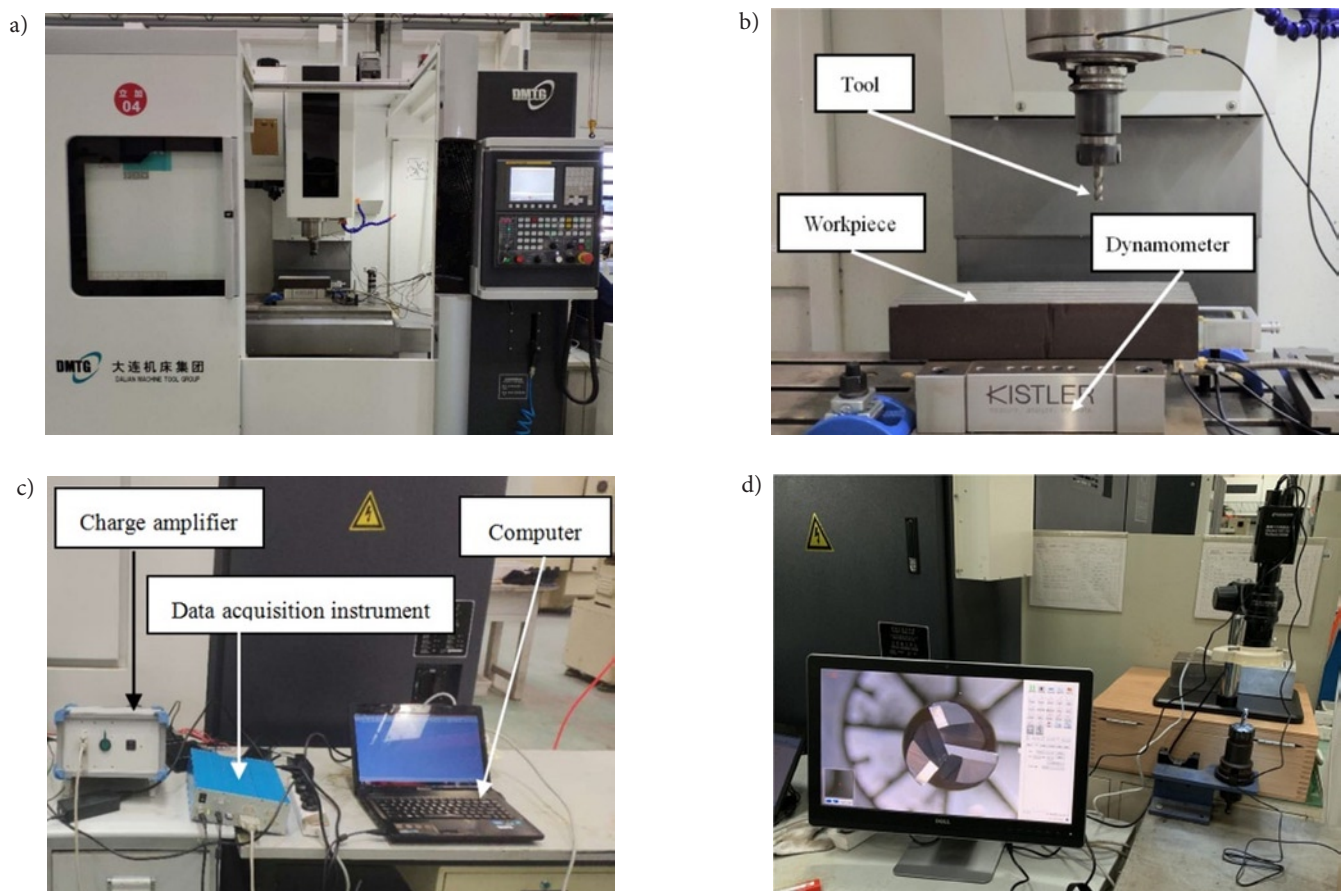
Experimental end milling TCM setup [25]: a) vertical machining center, b) end milling experimental platform, c) data acquisition instrument, d) tool microscope
